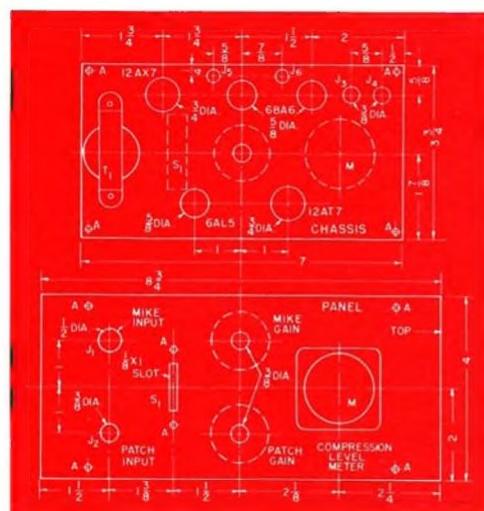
PANEL-CHASSIS LAYOUT diagram. The panel plate is viewed from the front; chassis plate from the rear. Drill mounting holes to match feet on T_1 and locate it between the plates if possible. Holes marked "A" are for corner posts, which should be 3 inches long, tapped at both ends.
